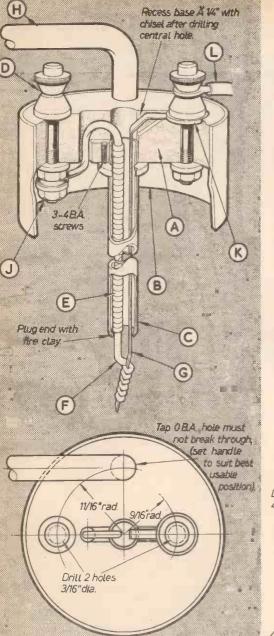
Pyrometer assembly. A-base; B-cover; C-tube; D-terminal; E-insulating beads; F-24G Nichrome wire; G-copper strip; H-handle; J-clamping nut.
